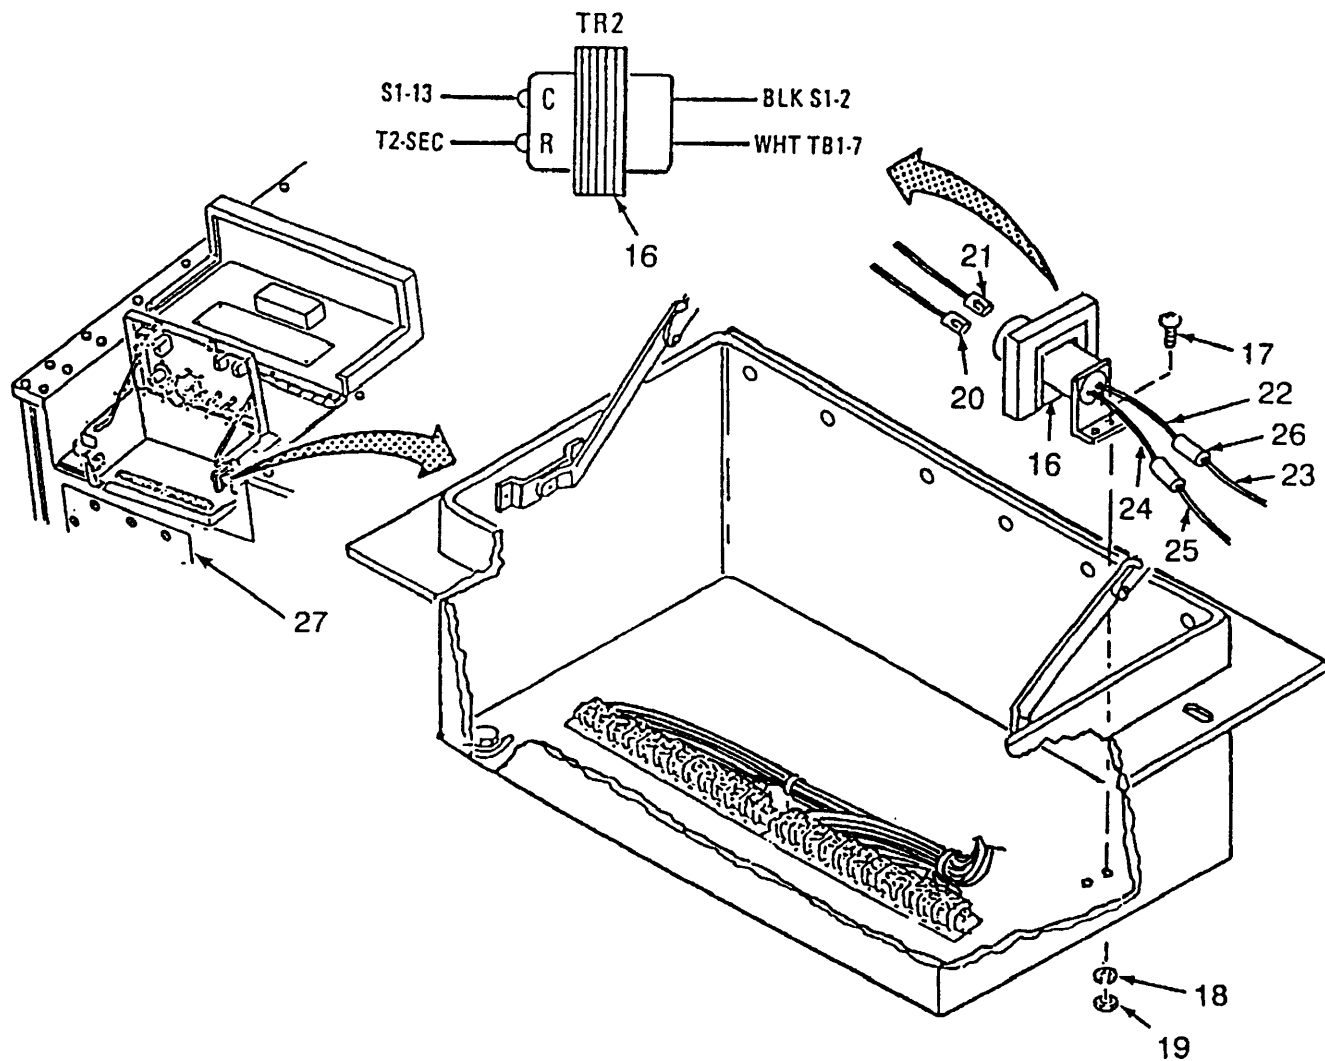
Control Box Assembly Terminal Boards/Transformer (Sheet 3 of 3)
